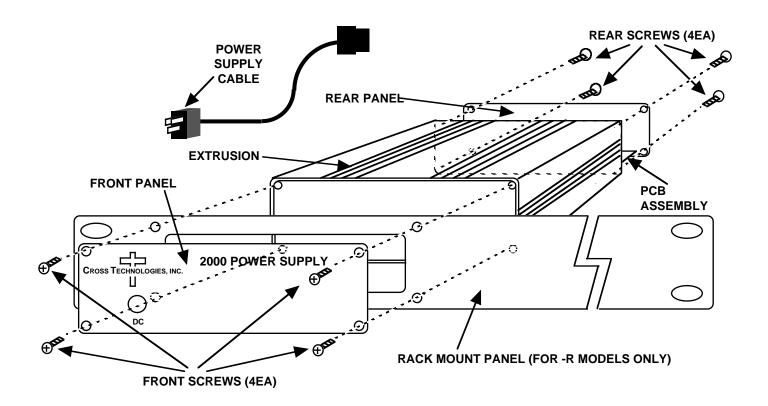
Mechanical Assembly (Rack Mounting)
